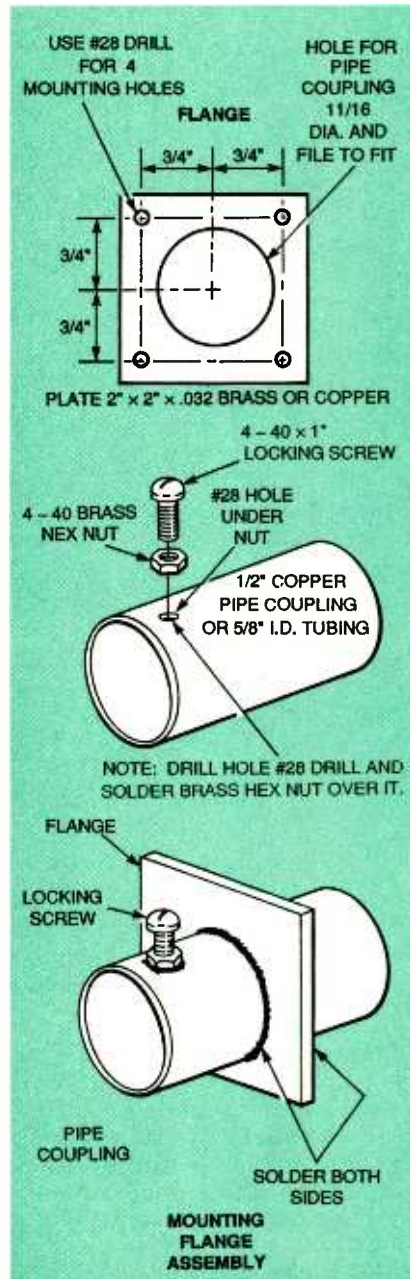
DETAILS AND DIMENSIONS for the mounting flange assembly.
